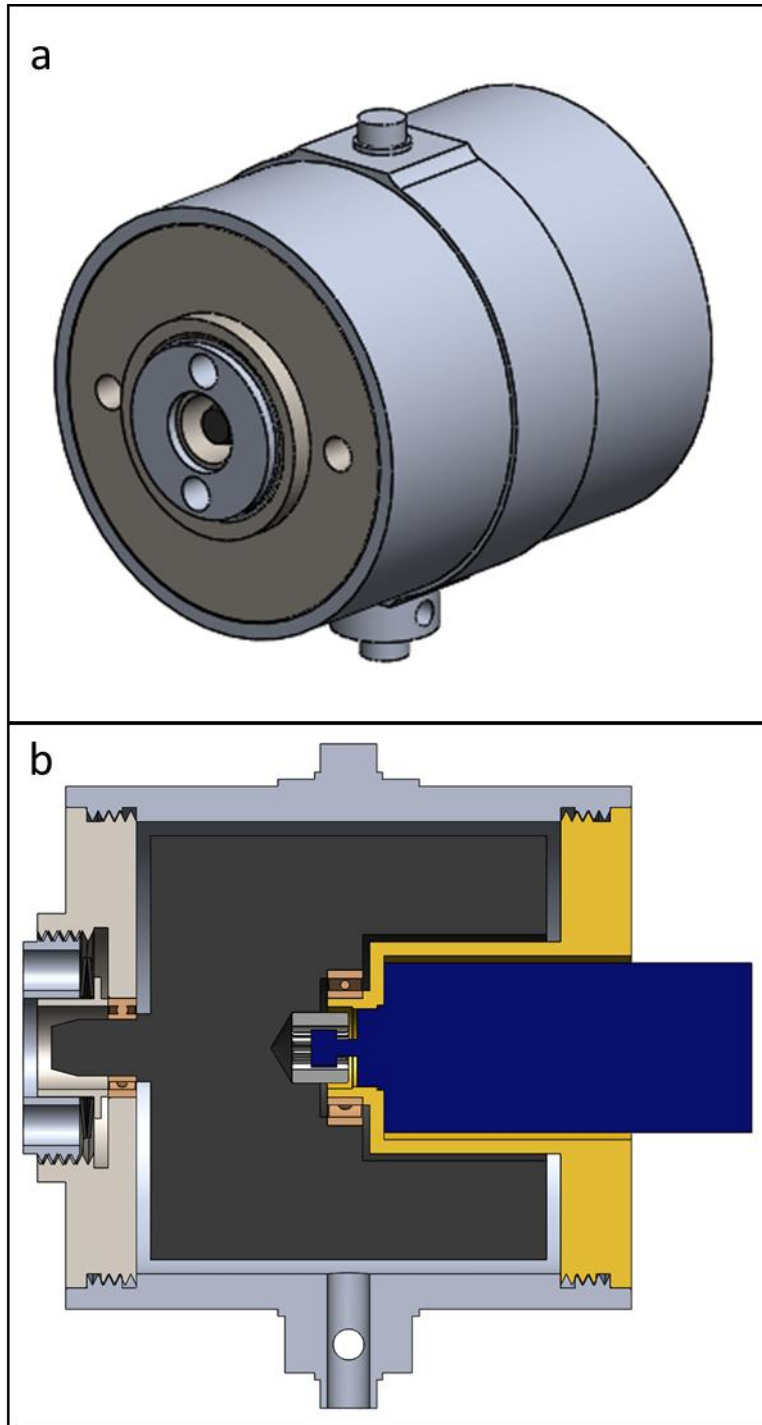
Completed V2Suit spin assembly isometric (a) and cross section (b) views.
